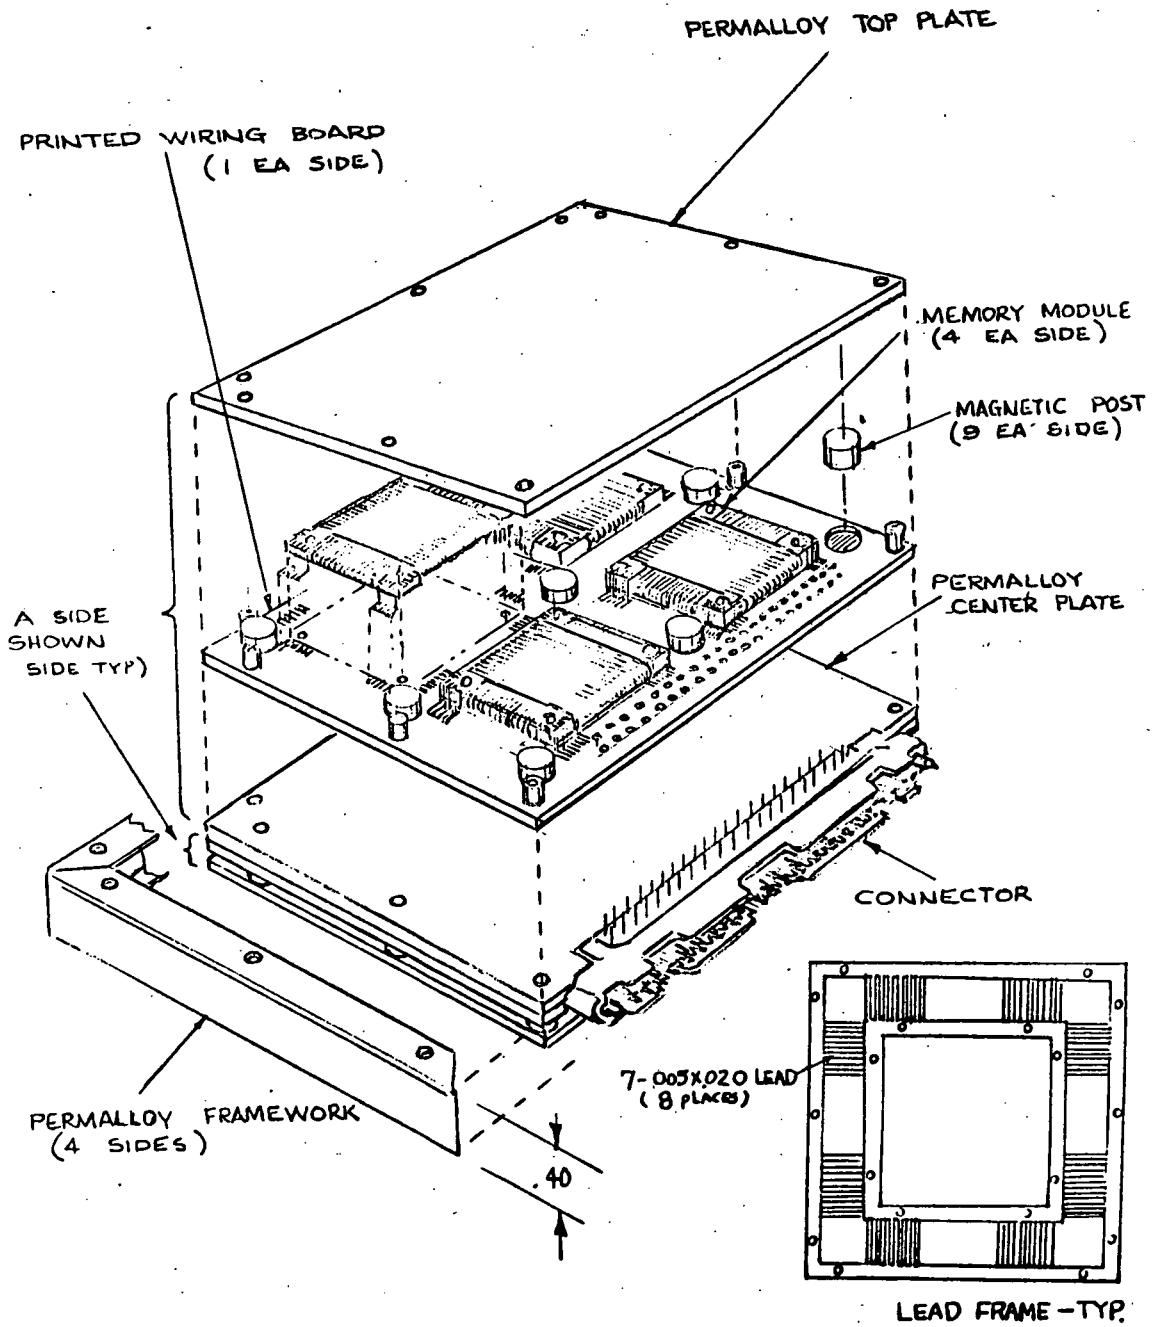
A3-9 Memory Sub-Assembly, Exploded View
